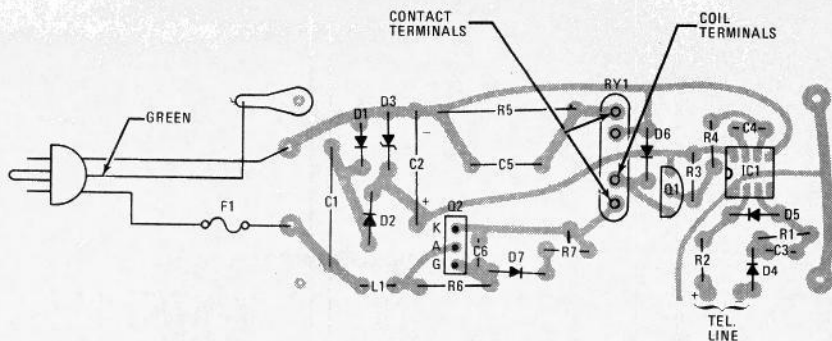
COMPONENT PLACEMENT diagram for the ring detector PC board.
